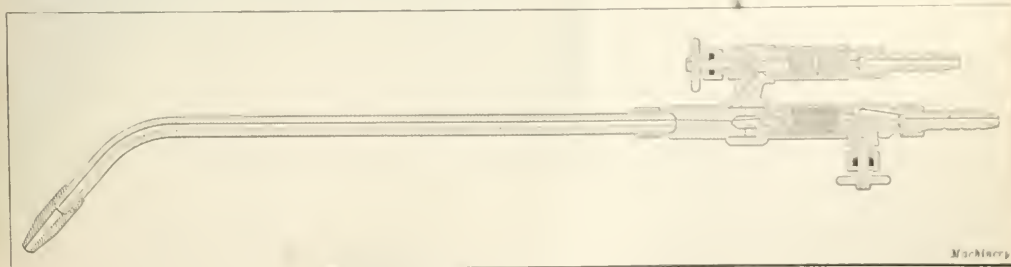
Type of Welding Torch made by the Prest-O-Lite Co.
